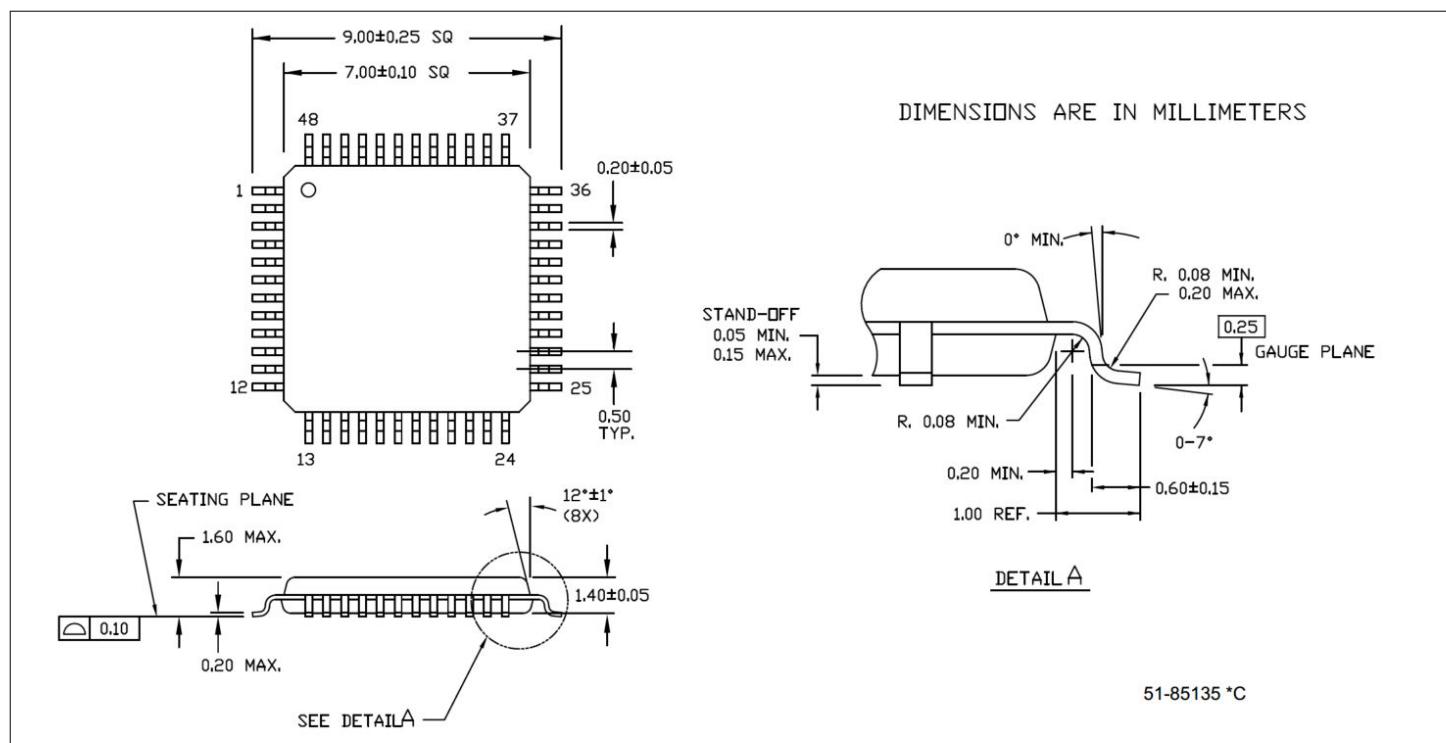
48-Pin 7 × 7 × 1.4 mm TQFP package outline (PG-TQFP-48)
